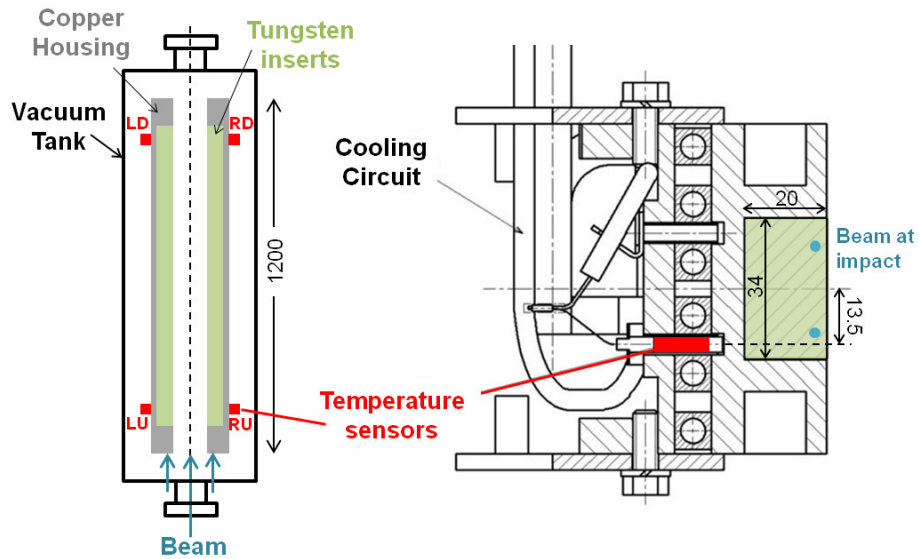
Schematic diagrams of a standard horizontal TCT. Top view (left) and front view (right) of the cross-section of the left jaw assembly. The positions of the jaw temperature sensors (LU, LD, RU and RD) are indicated. All dimensions are in mm.
